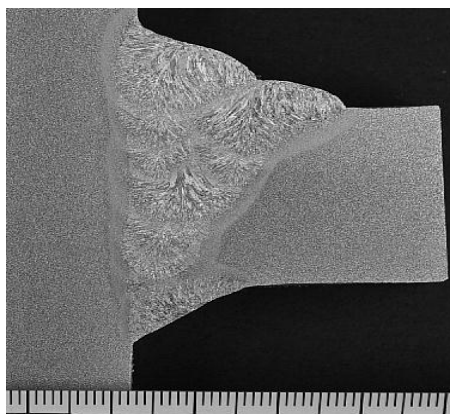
Cross section applied to the overlay by overhead and flat combination welding process
